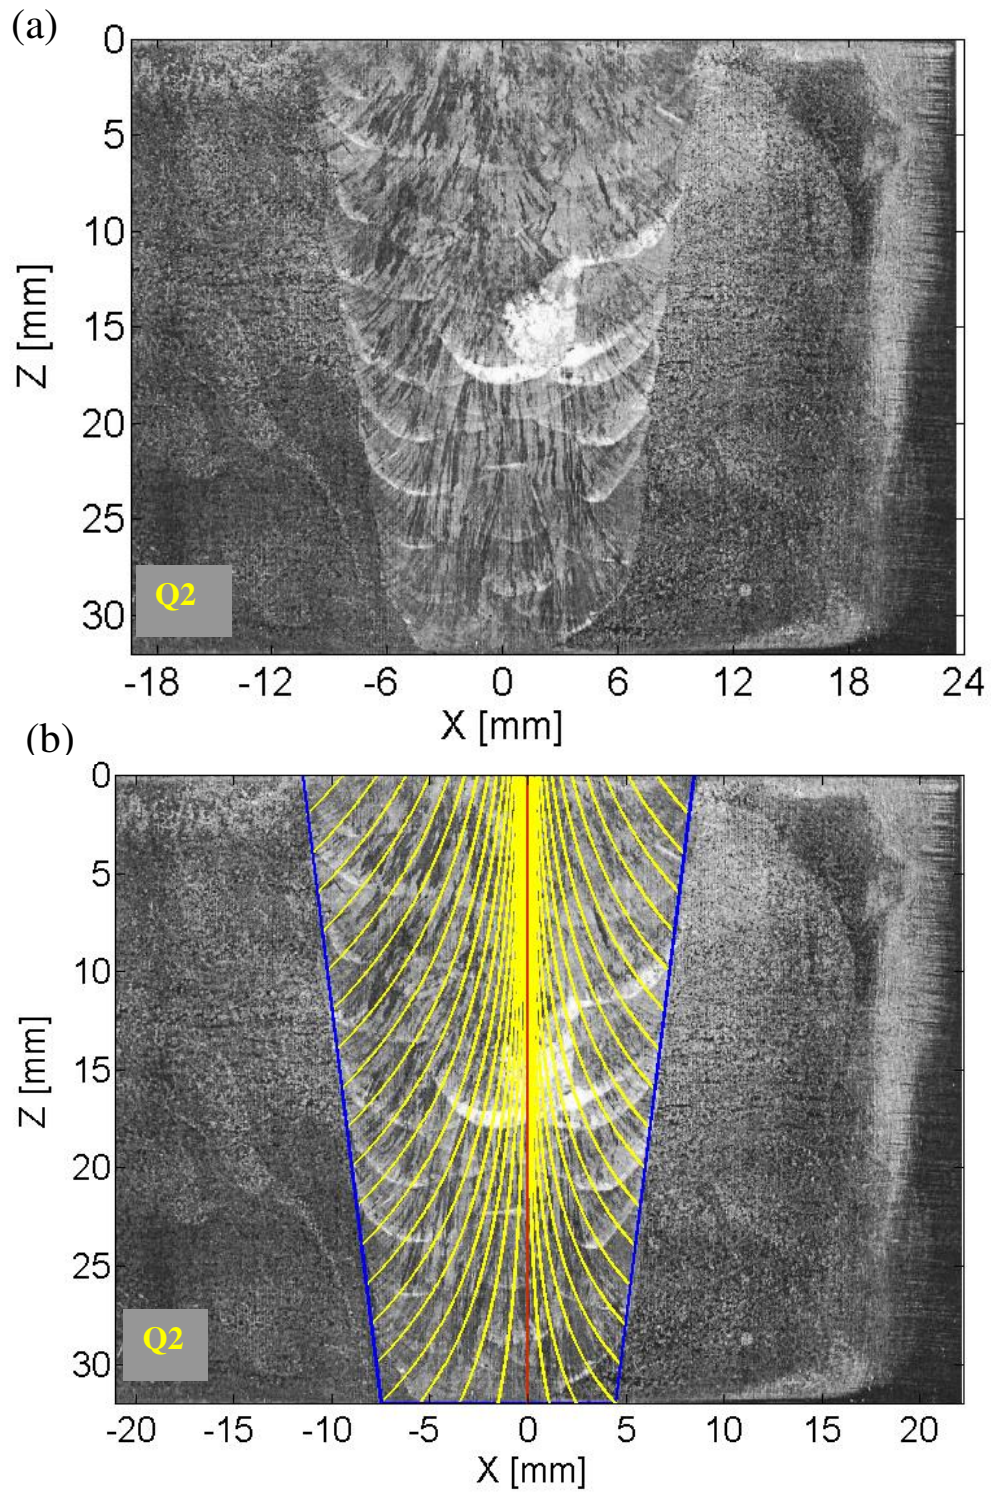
(a) Macrograph of the Cr-Ni based austenitic weld specimen Q2. Weld data: root tungsten inert gas welded, filler layers manual metal arc welded, V-butt austenitic weld thickness 32 mm. (b) Comparison between weld structure model and real macrograph of specimen Q2.
